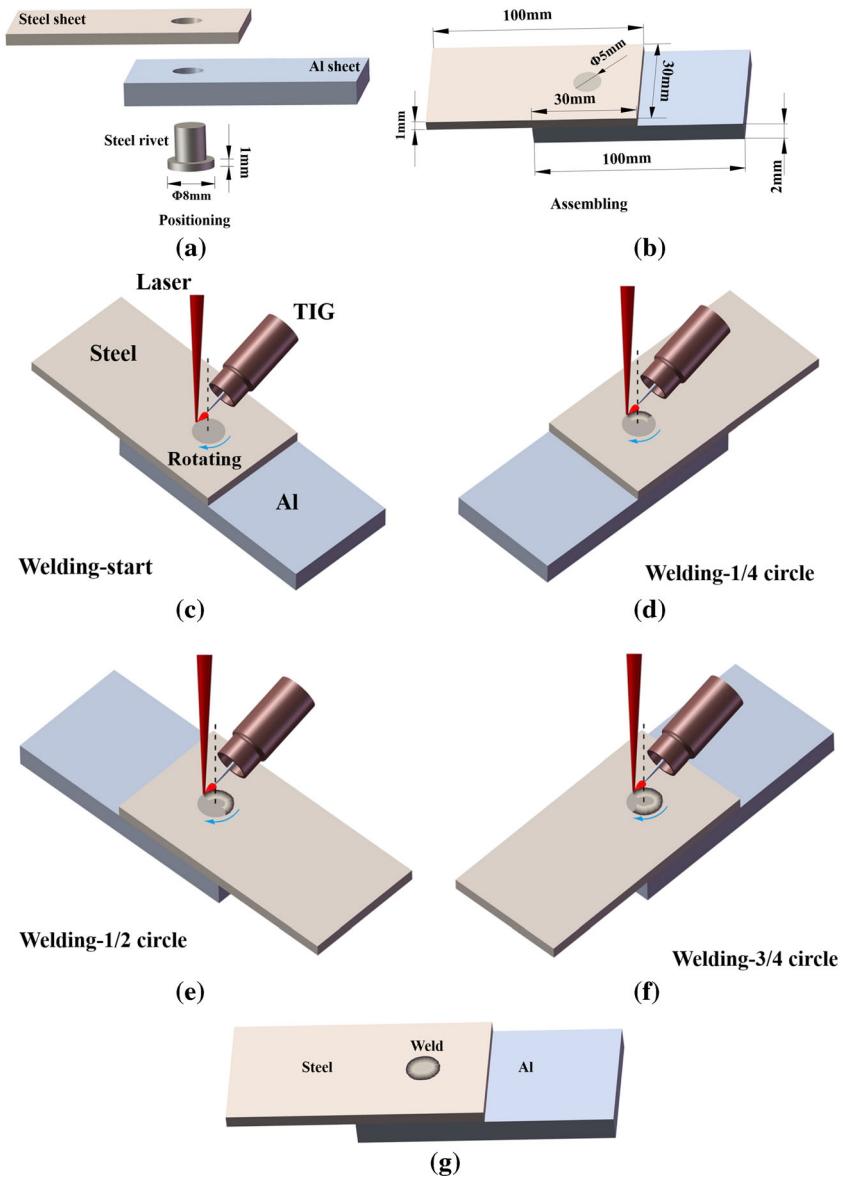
(a), (b) Dimensions and assembly diagram of the welded specimen. (c) - (f) Schematic diagram of the Al/Steel welding-riveting process. (g) Diagram of the tensile test specimen. [84]
